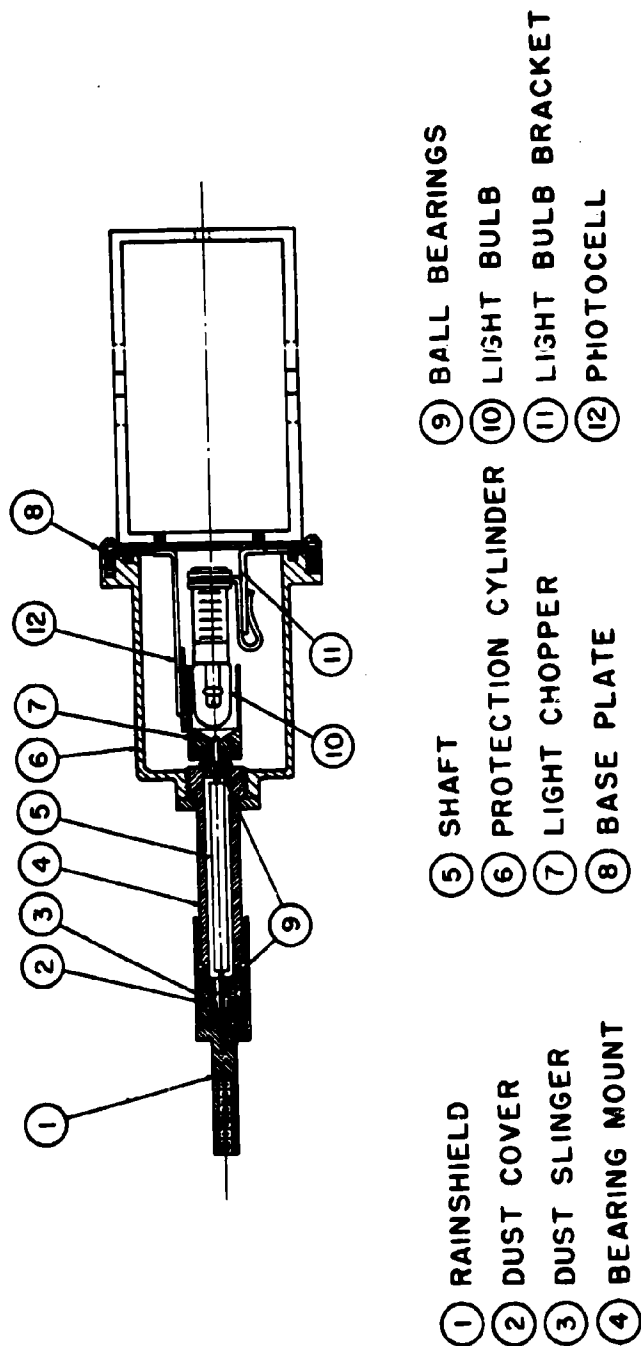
Assembly Drawing of Anemometer Portion of the Gelman-Gill Anemometer Bivane
